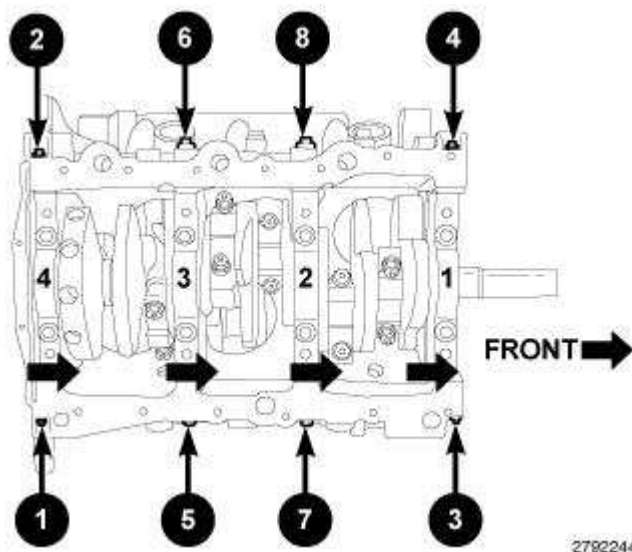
Main Bearing Tie Bolts Removal Sequence
